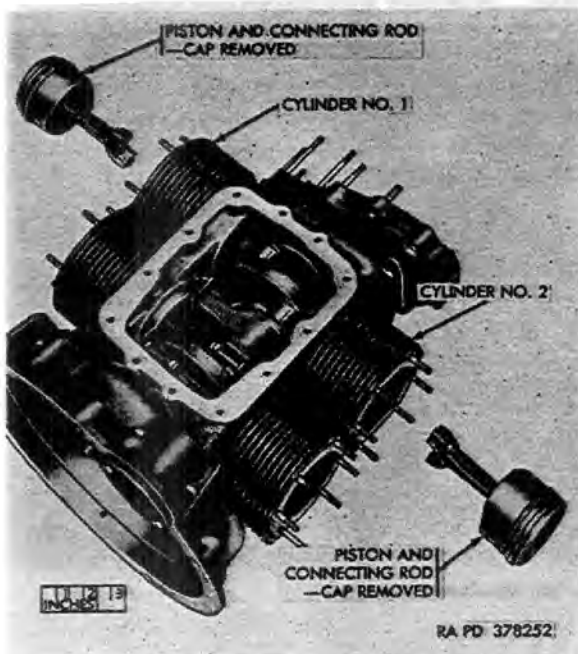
Removal of pistons and connecting rods from cylinders No. 1 and 2.
